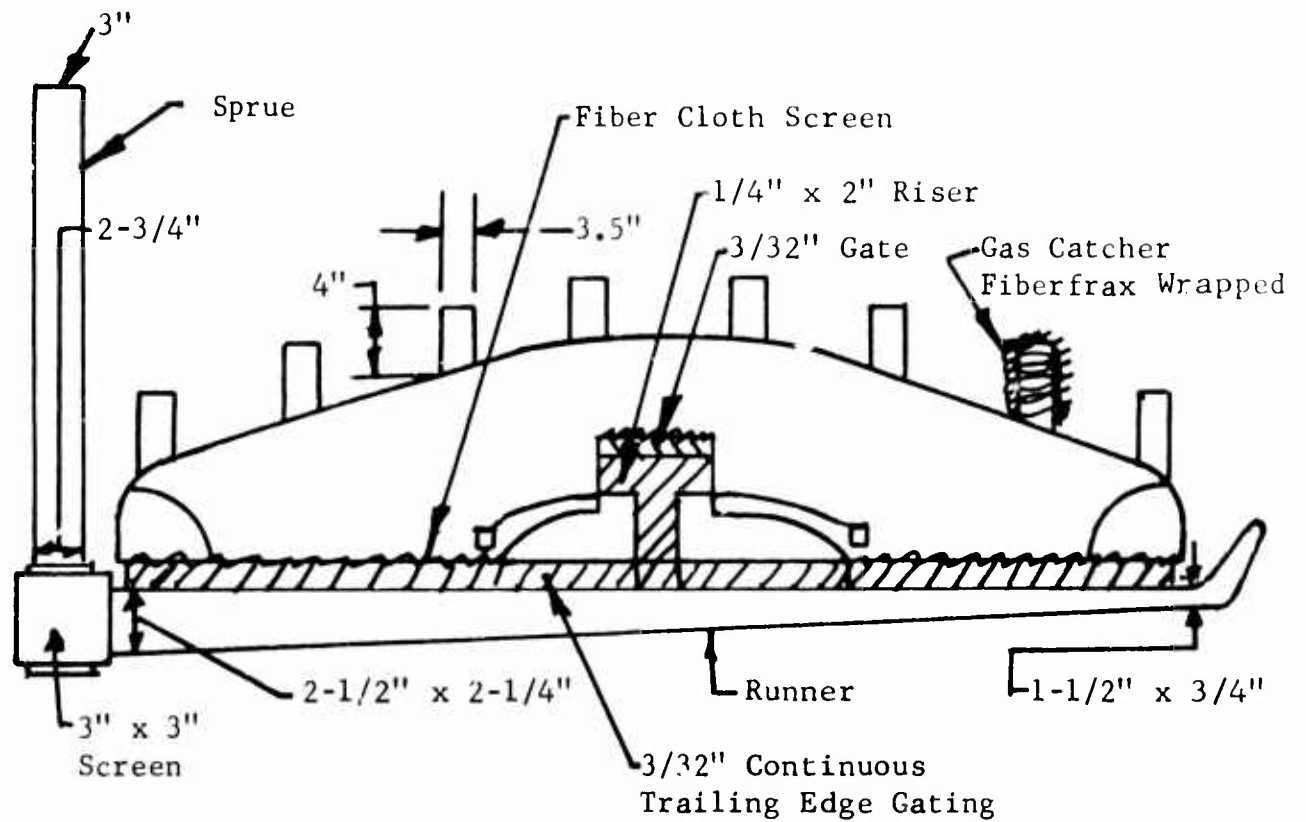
Gate Layout Used in Green Sand Mold for Casting the A356 Aluminum Major 12 to 6 O'clock Strut.
